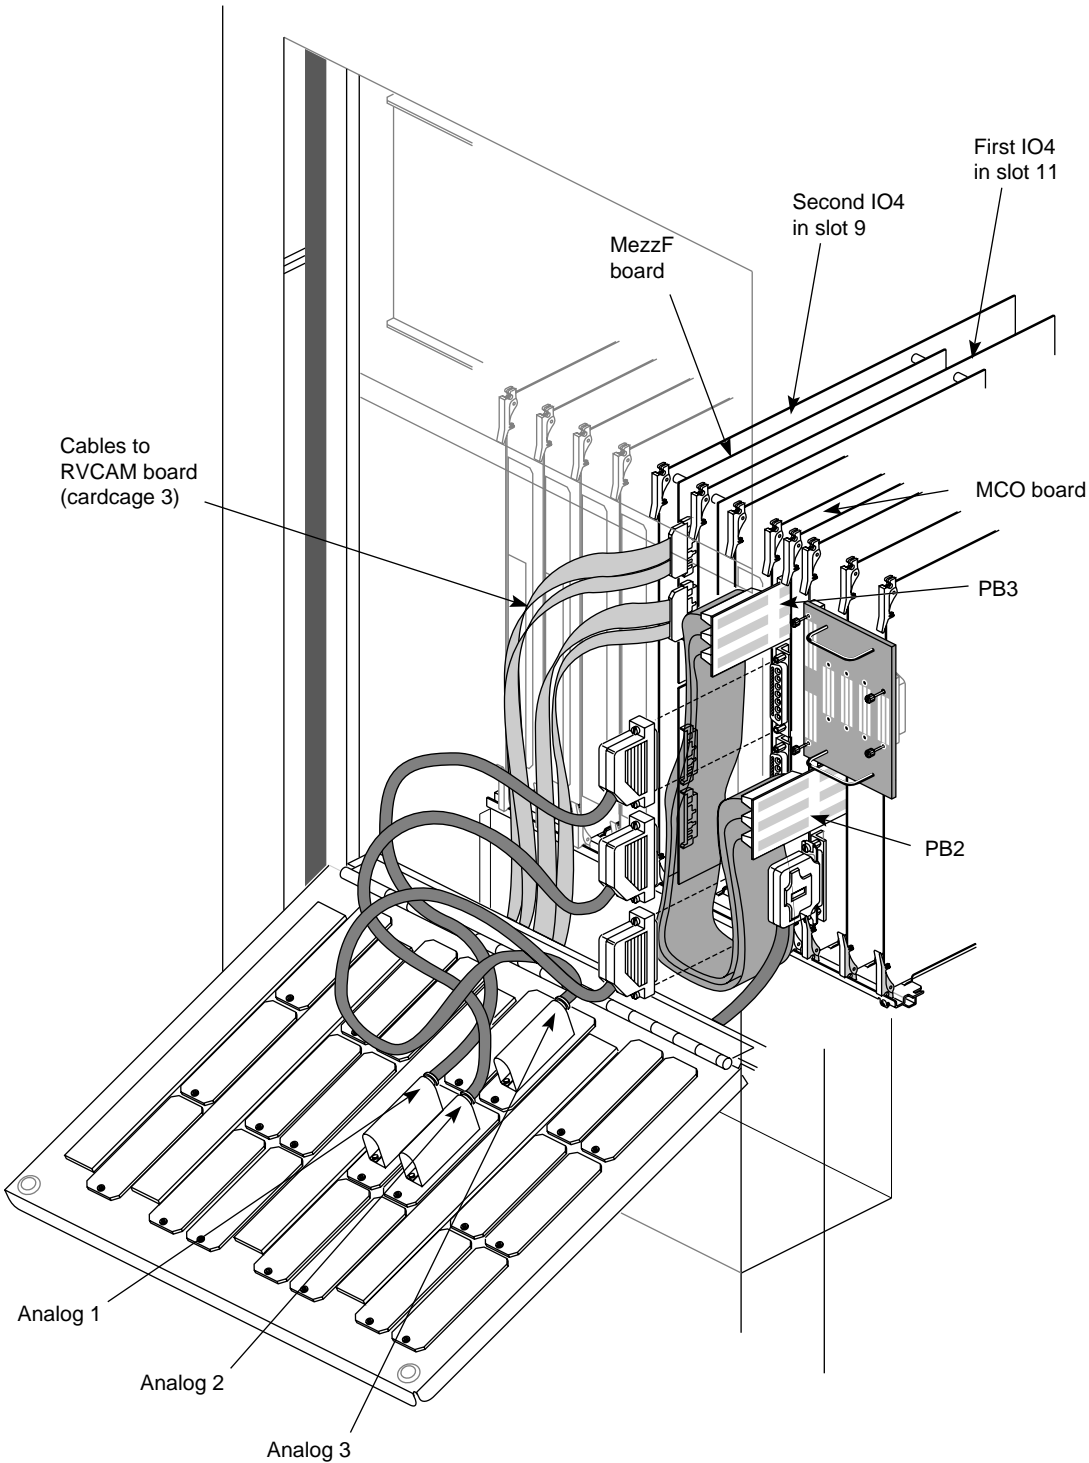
Complete Multi-Channel Option Installation for Onyx Rackmount (Cardcage 2) (Breakout Box Version)
